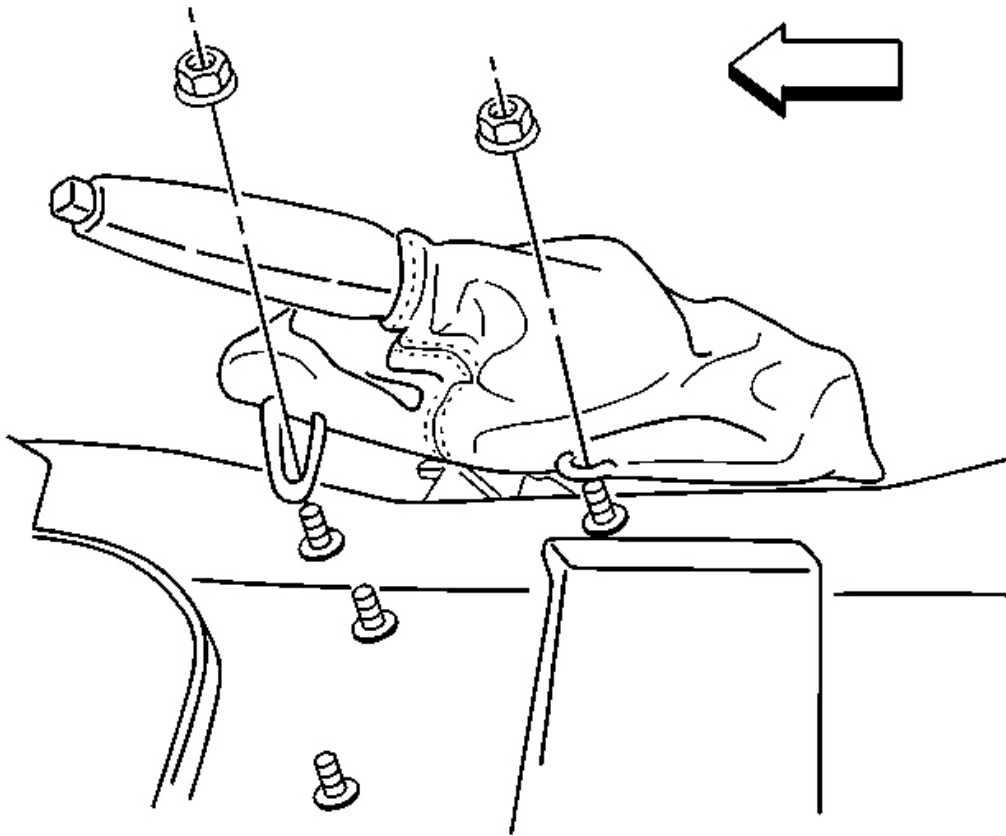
Disengage Retainer Clips On Park Brake Lever Boot
